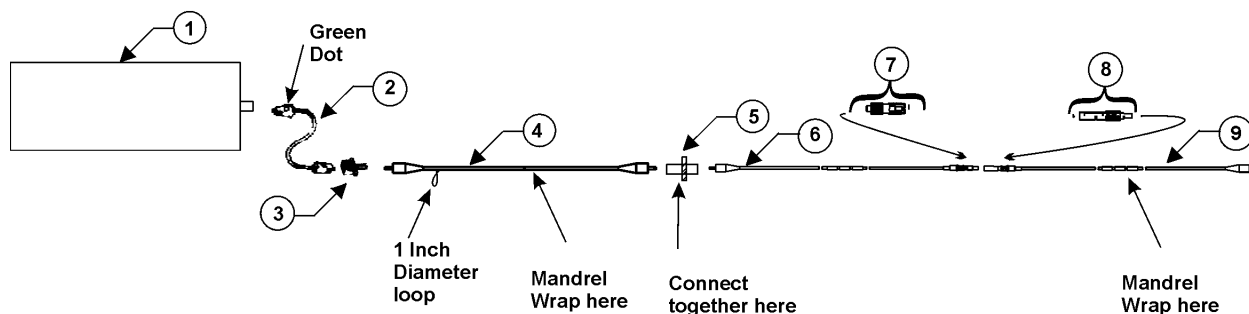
I1-3. Return loss measurement: Socket termini-to-pin termini configuration (example: port-to-starboard cable assembly).
